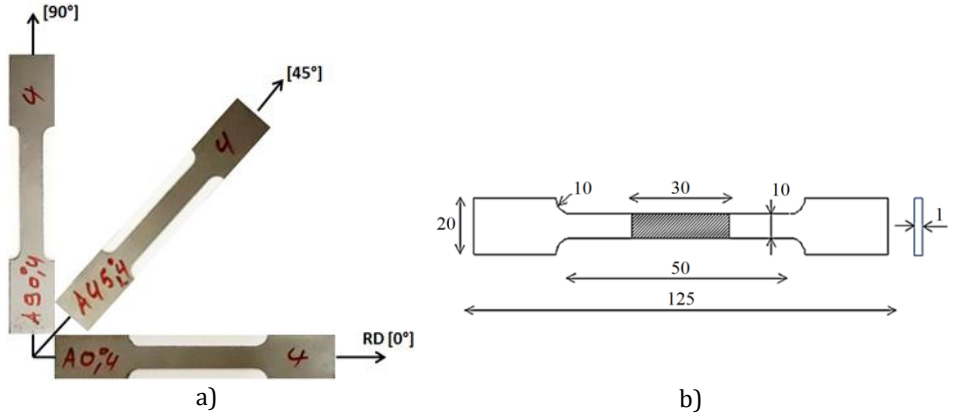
Uniaxial tensile test specimen NF EN 10002, Sampling and geometry
